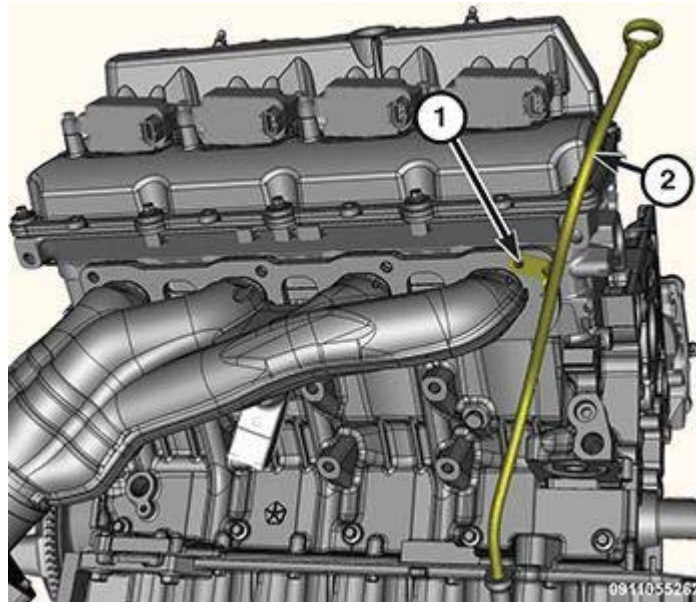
Engine Oil Tube, Dipstick & Fastener
